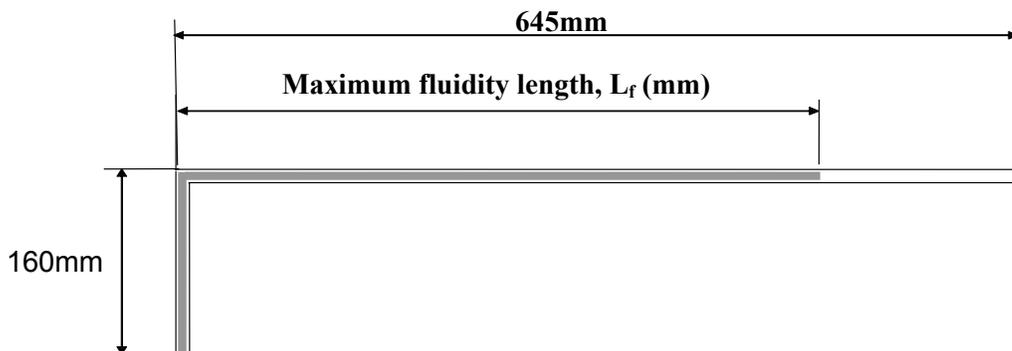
Fluidity Measurement Tube Dimensions and Method of Measuring Fluidity
